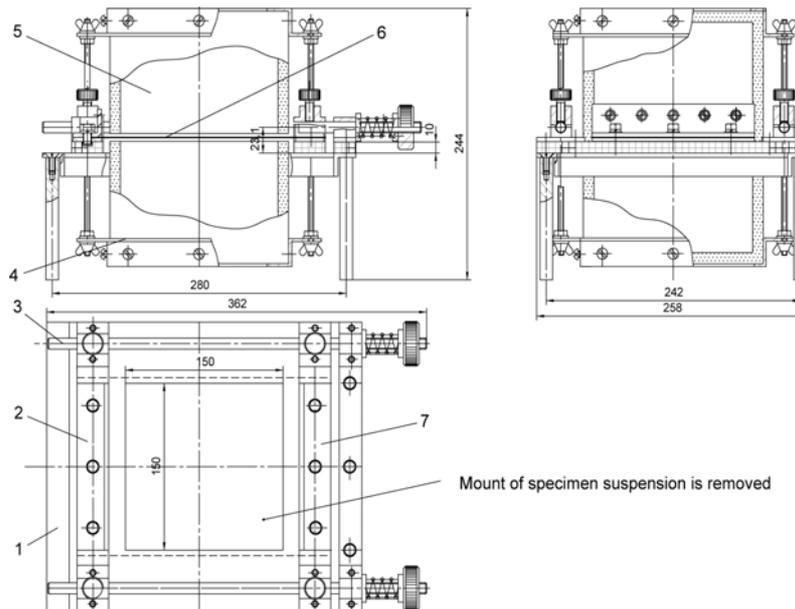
The EM-2 module assembly drawing: 1 – basis; 2 – immobile hold-down strap; 3 – guide rod; 4 – specimen's suspension unit; 5 – specimen in heat-insulating holder; 6 – heating element; 7 – mobile hold-down strap.
